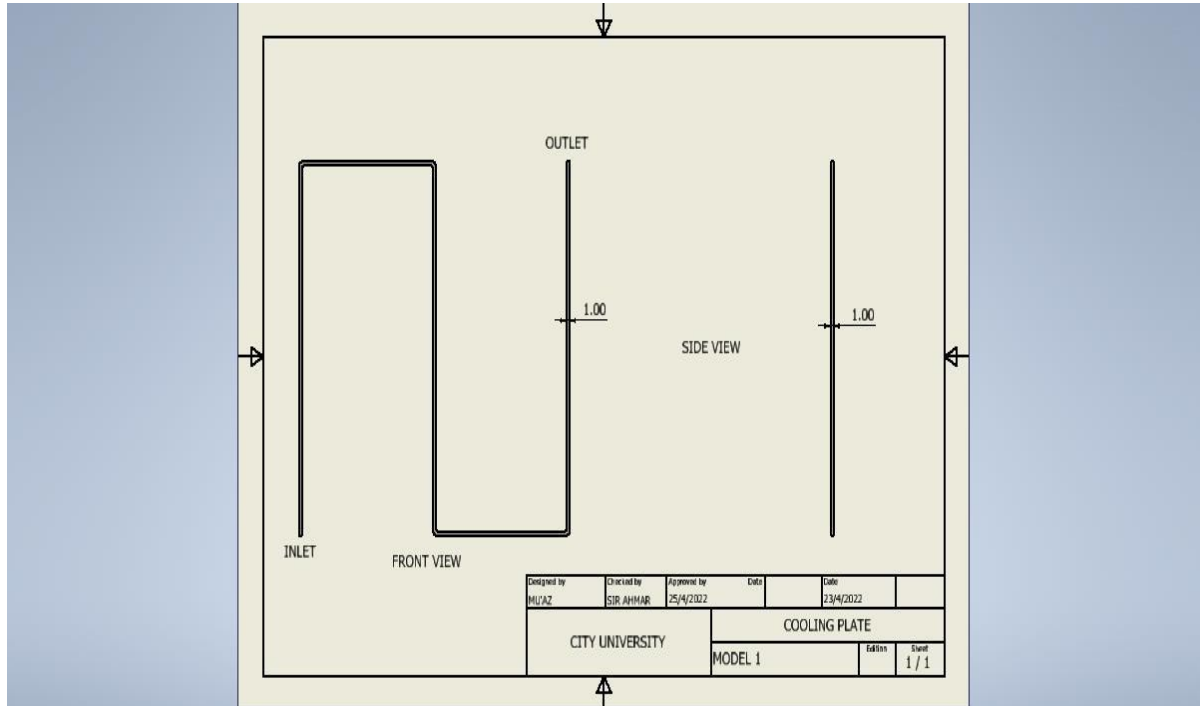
Sample design of the model in which the height and width will change referring to each model dimension. The dimension shown in the front view indicates the width while, dimension shown in the side view indicates the height.
